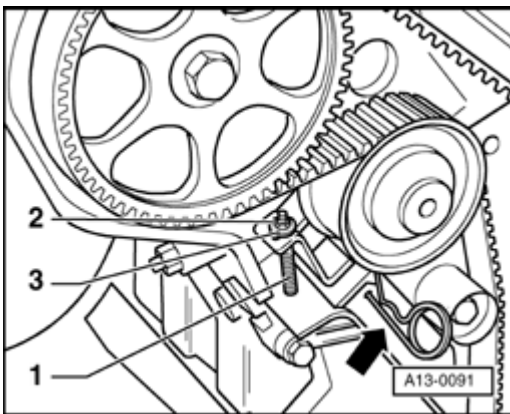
Screwing Stud Into Toothed Belt Tensioning Element & Hex Nut Onto Stud Using Large Washer
